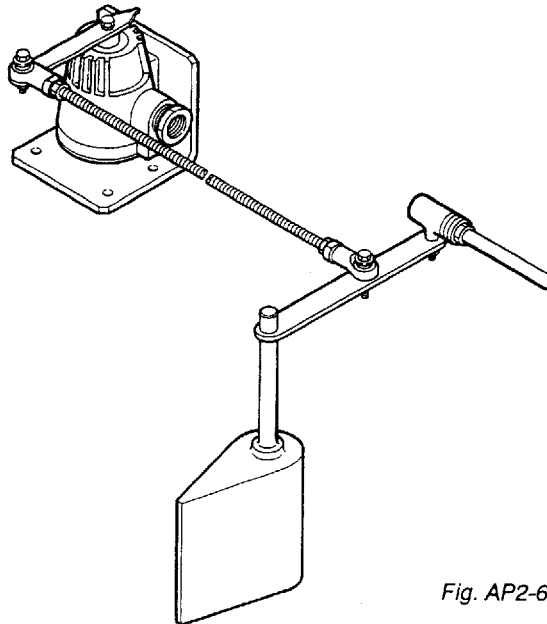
Mounting the RRU at the opposite side of the tie rod
